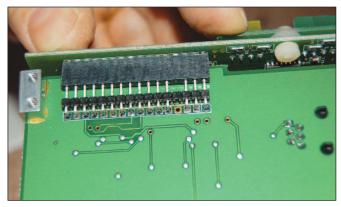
The display board plugs into the main circuit board using 16 pin in-line connectors. You can see one of the 2-D fasteners attached to the main circuit board in the top left corner.
